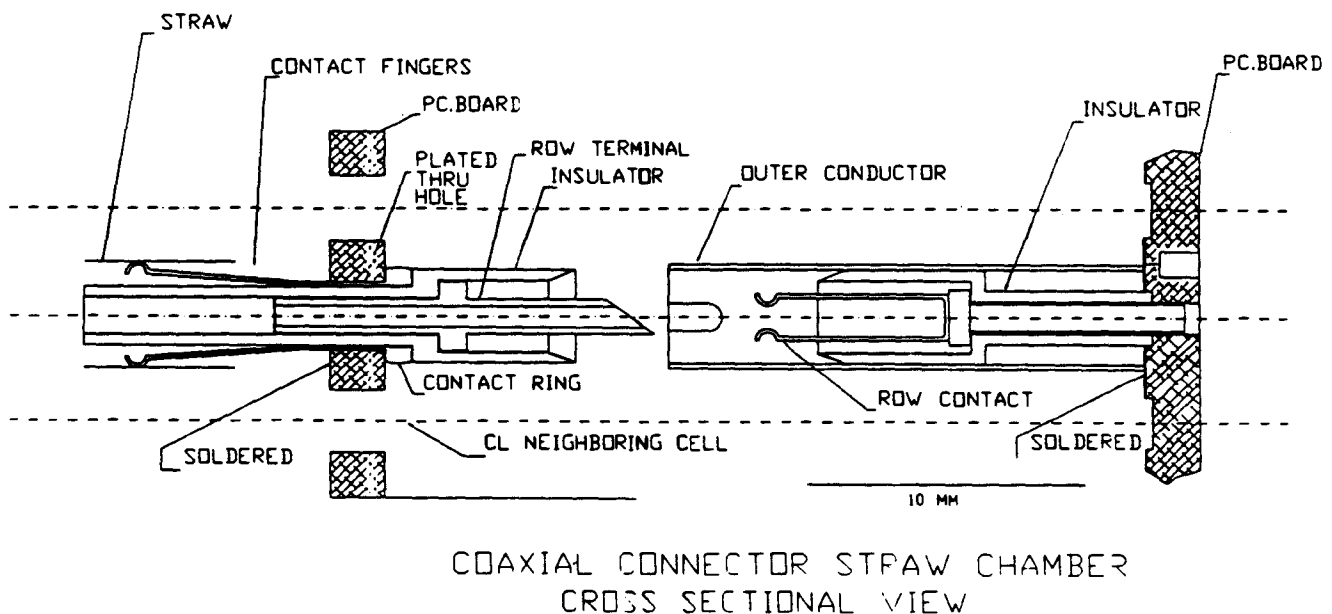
A scheme for anode wire and cathode tube electrical connection to the readout board. The sliding spring contacts permit ready attachment and removal of the board.
